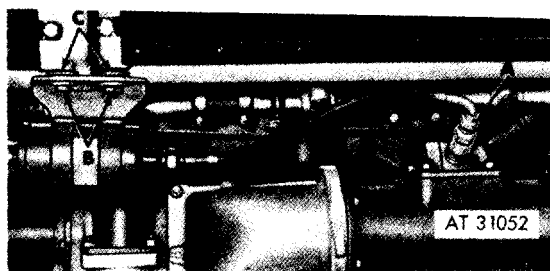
Oil filler and oil level indicator tube shroud plate oil drain hose grommet-installed view-engines with oil filler and indicator with splash pan drain.
